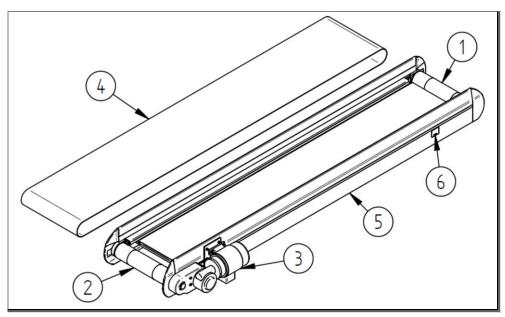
Exploded view of a straight belt conveyor (typical conveyor)
